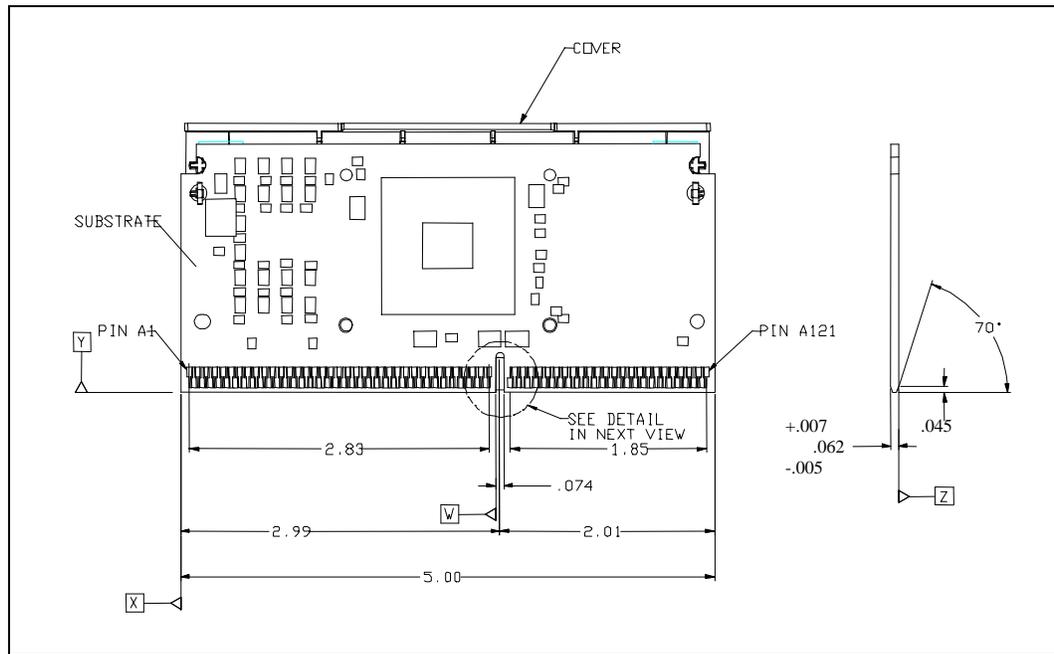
S.E.C.C.2 Packaged Processor Substrate — Edge Finger Contact Dimensions (Detail A)
